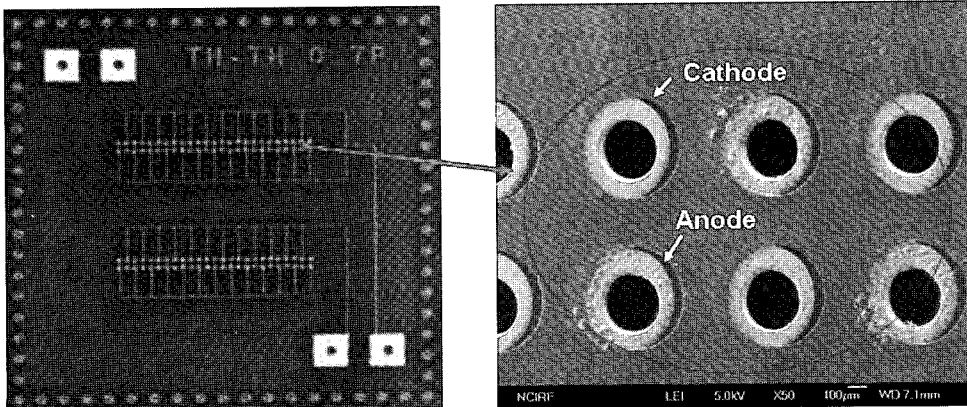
Test specimen of PCB with 300 μm insulating distance; (a) PCB test board, (b) SEM image of test specimen (array of through-hole via)
